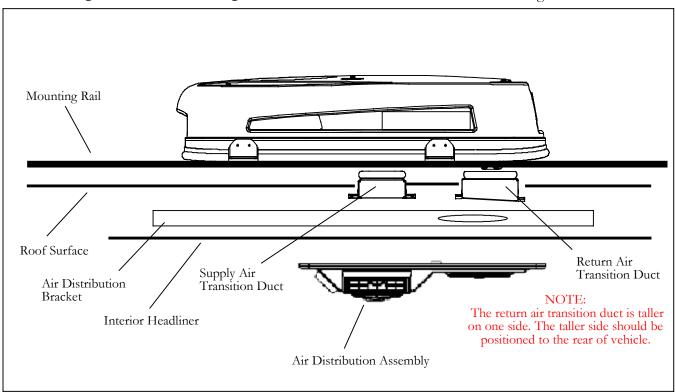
General Assembly Layout of Rail Mounted Unit
